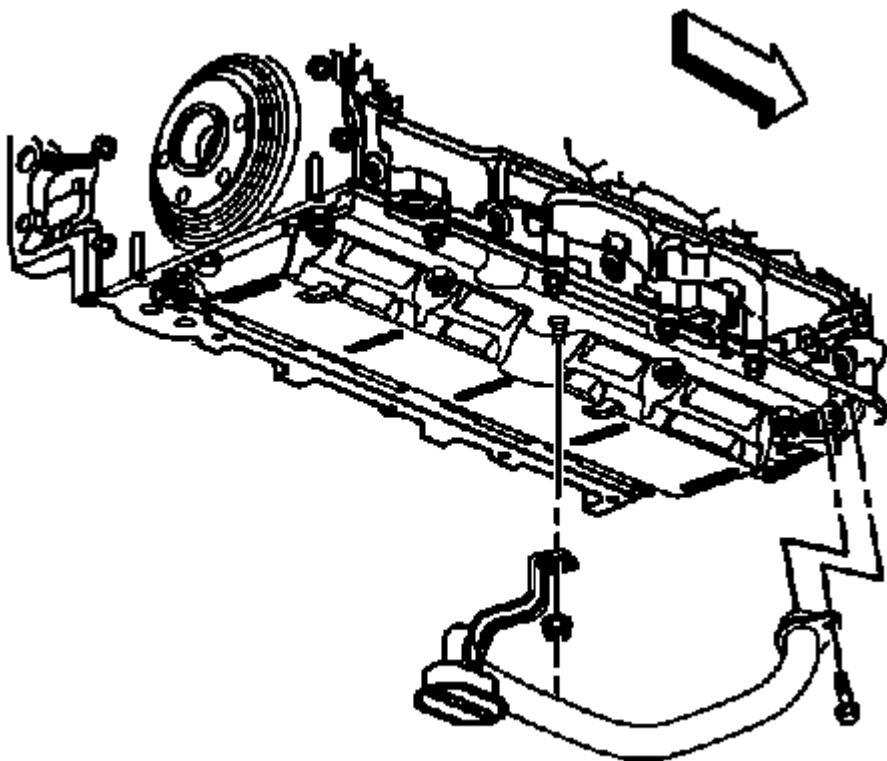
Identifying Oil Pump Screen, Bolt & Nut
